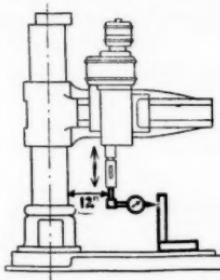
Perpendicularity of feed movement of spindle to table.
